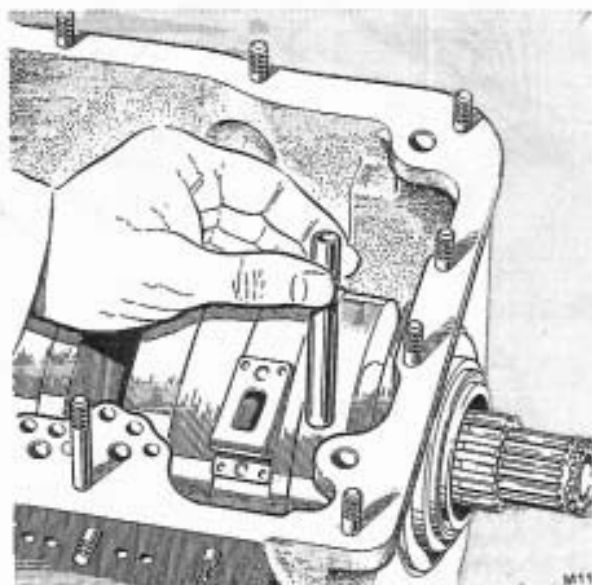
WITHDRAWING THE PUMP FEED PIPE
